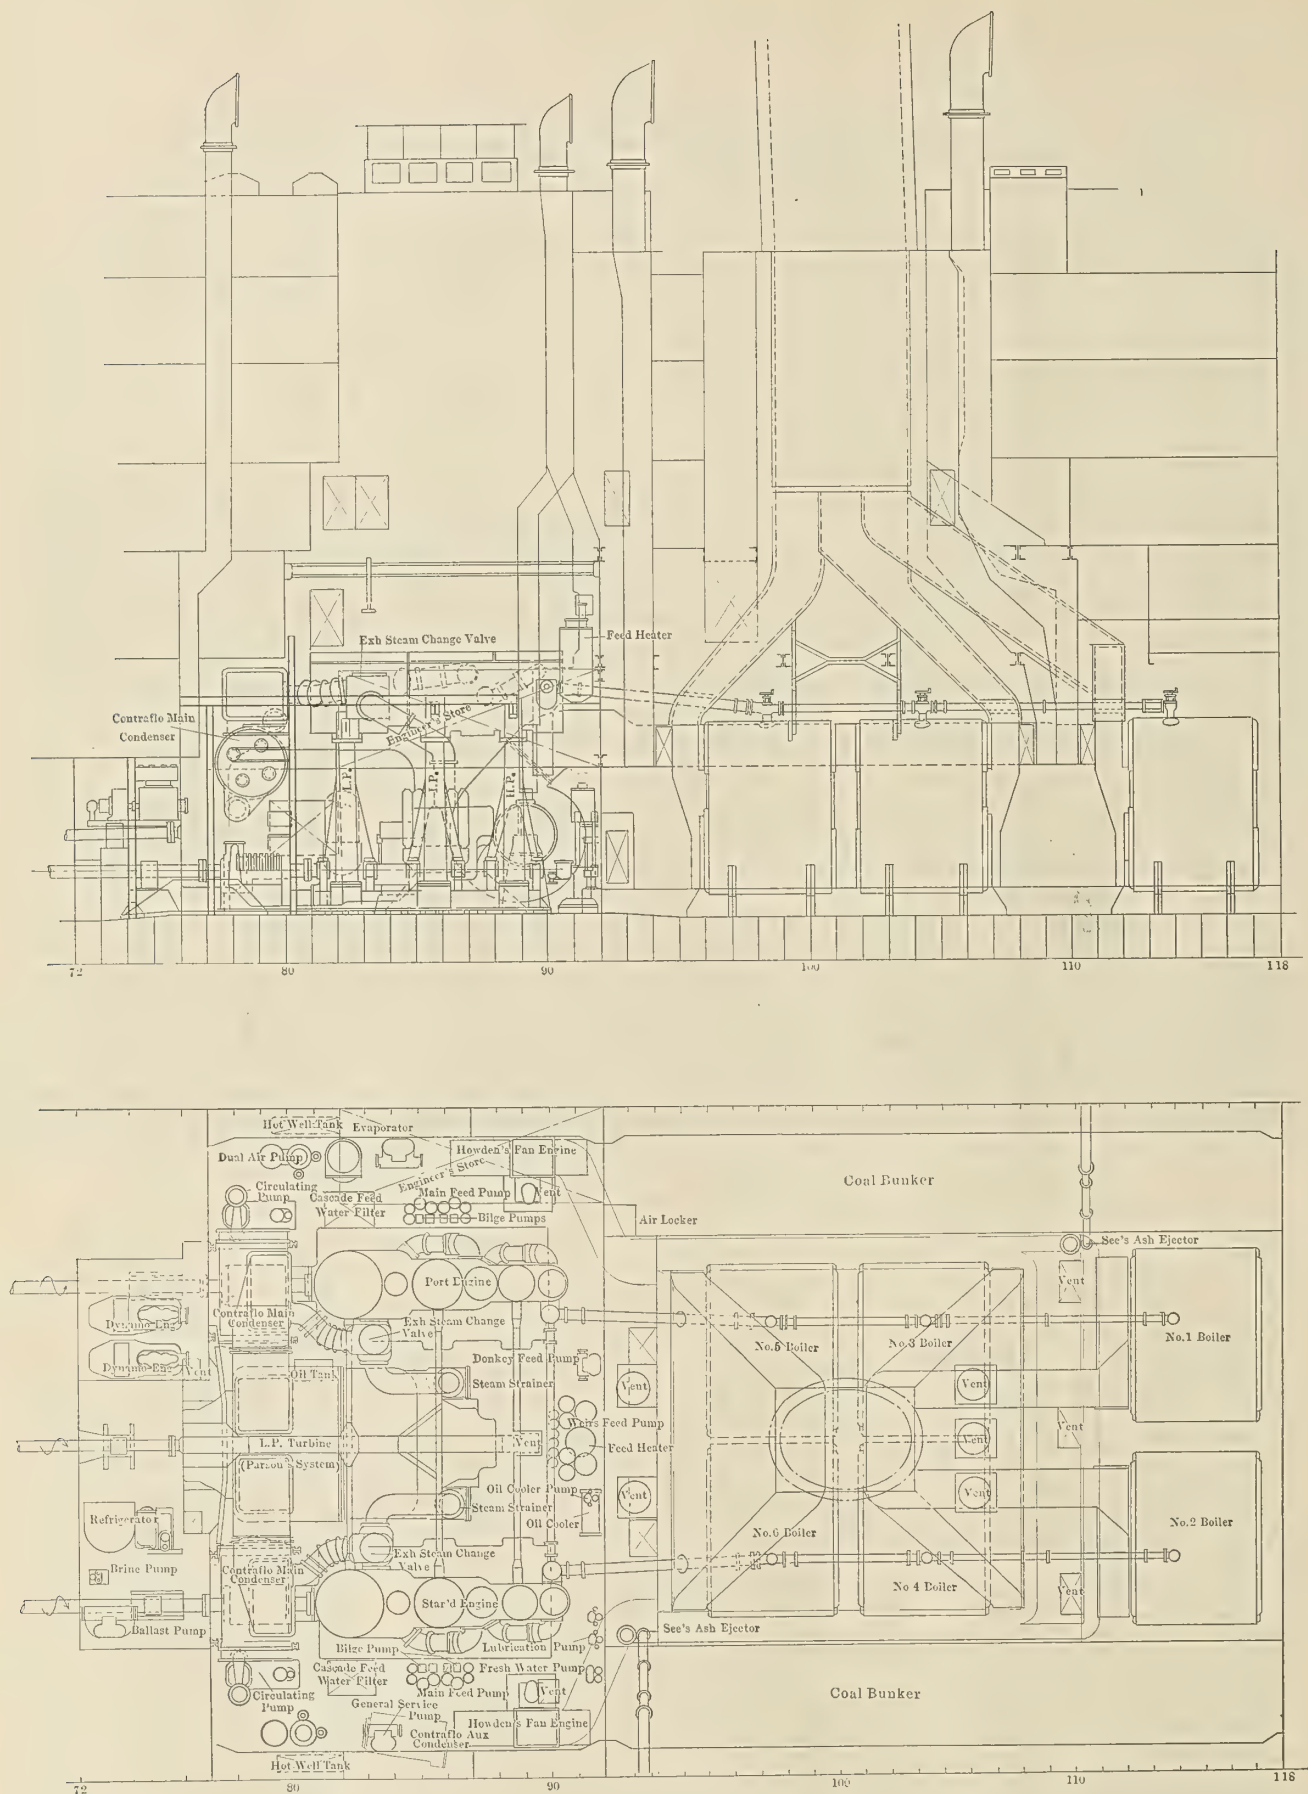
Longitudinal Section and Plan of the Machinery Space, S. S. Katori Maru. Wing Screws Driven by Triple Expansion Reciprocating Engines and Center Screw by Low-Pressure Parsons Turbine. Total Indicated Horsepower, 11,700
